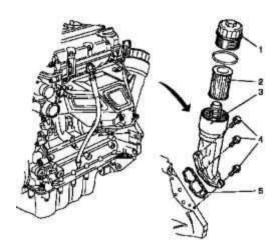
,221. Disconnect power supply systems and engine control: 1 - cap 2 - filter element 3 - the oil filter housing, 4 - bolts fastening, 5 - gasket
